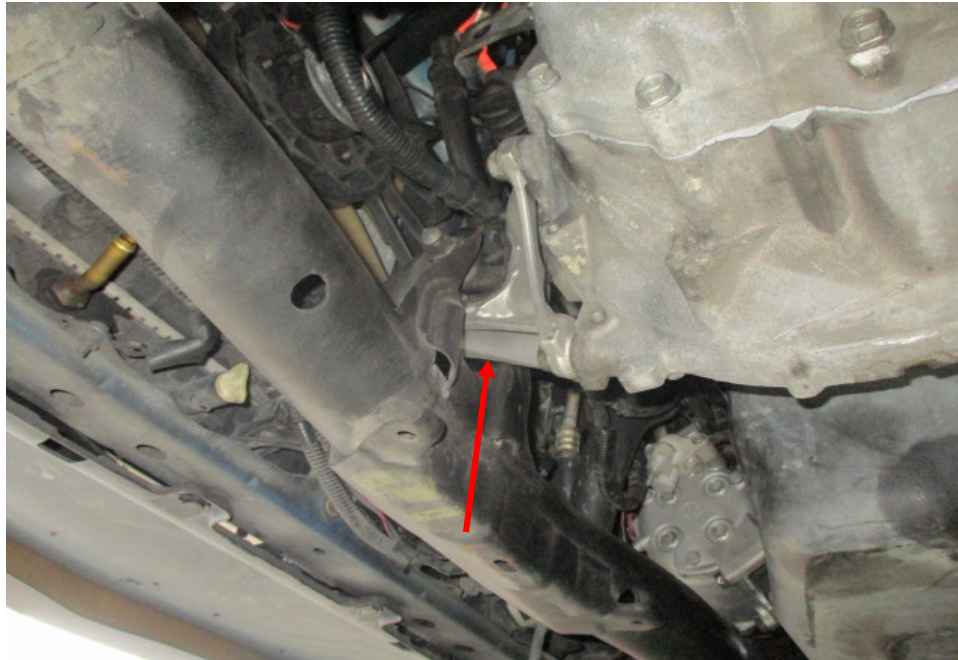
shows another view of the transmission assembly (red arrow) that was fitted on the Motor Car. This was at the input side where the transmission assembly is bolted onto the crankshaft side of the engine block. The transmission assembly of the Motor Car was supported by 3 brackets. One at the front of the transmission assembly, one at the rear of the transmission assembly (yellow arrow) while the other was at the left side of the transmission assembly.
